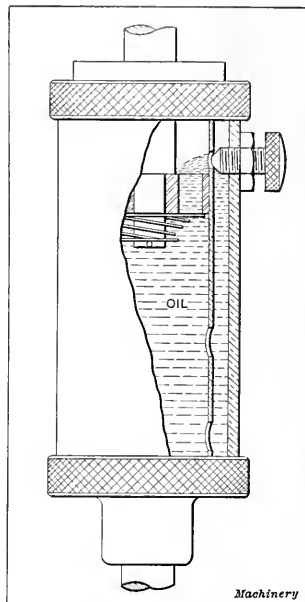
Type of Roller Bearing Cage for which Langelier Drill Head was designed
